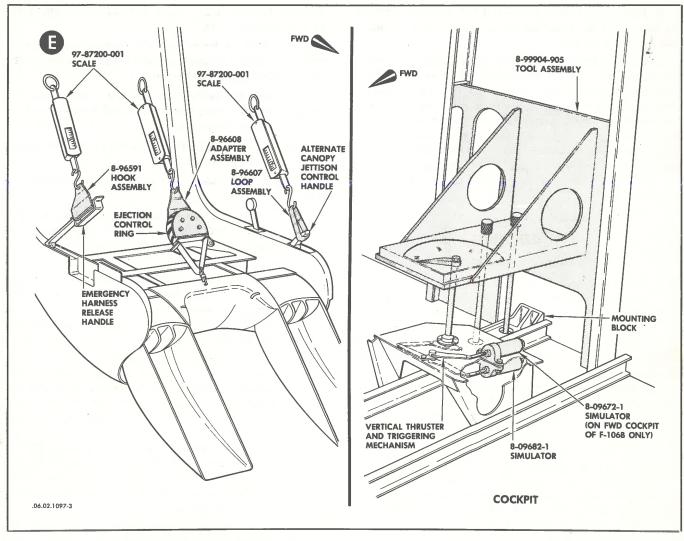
Rotational Upward Ejection Seat Operational Checkout Equipment (Sheet 3 of 3)
